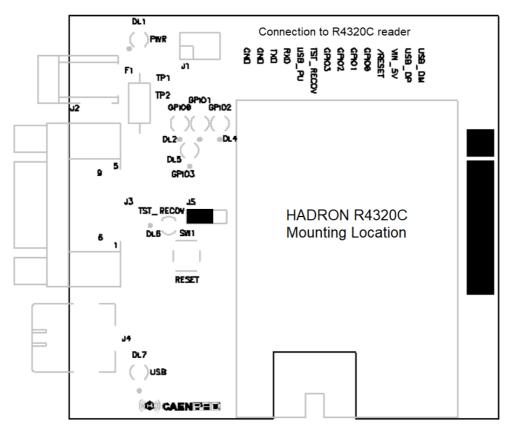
Hadron R4320CEVB Technical Drawing
